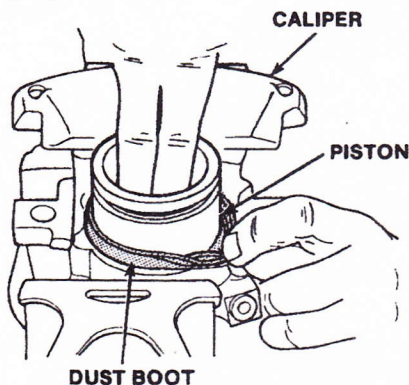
When installing a piston in a caliper bore, make sure the piston is lubricated.
